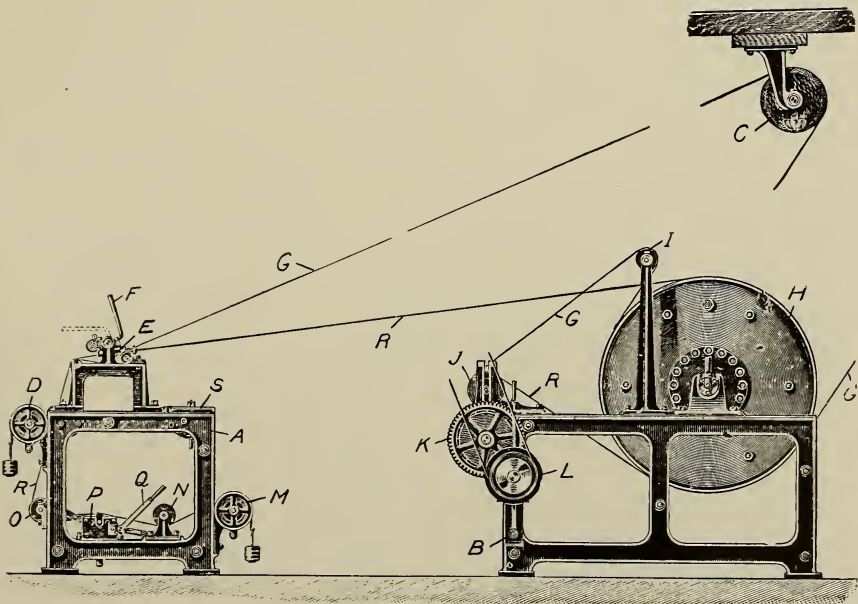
THE BRIDGE POLISHING, CURING AND PASTING MACHINE.
